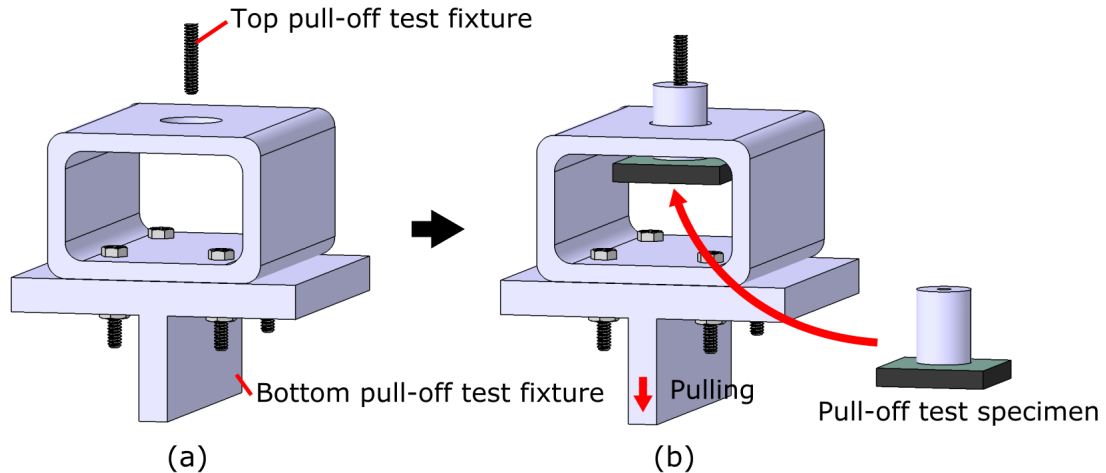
Schematic drawing of (a) the top and bottom pull-off test fixture and (b) the pull-off test specimen in the test fixture.
